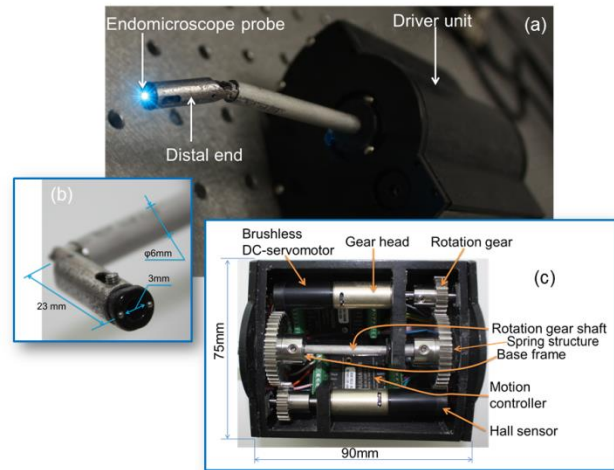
Prototype of the scanner. (a) The scanner with the endomicroscope probe inserted; (b) distal end showing dimensions; (c) details of the driver unit with rotation gear, brushless DC-servomotors, gear head and Hall sensor.
